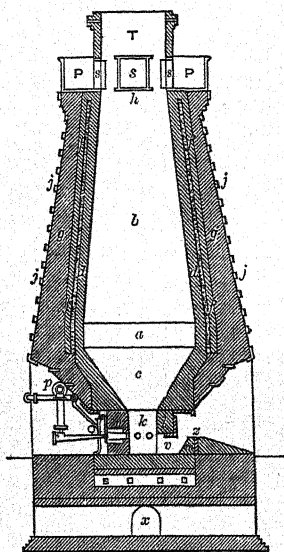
SECTIONAL ELEVATION OF A STAFFORDSHIRE OPEN-TOPPED BLAST-FURNACE.
